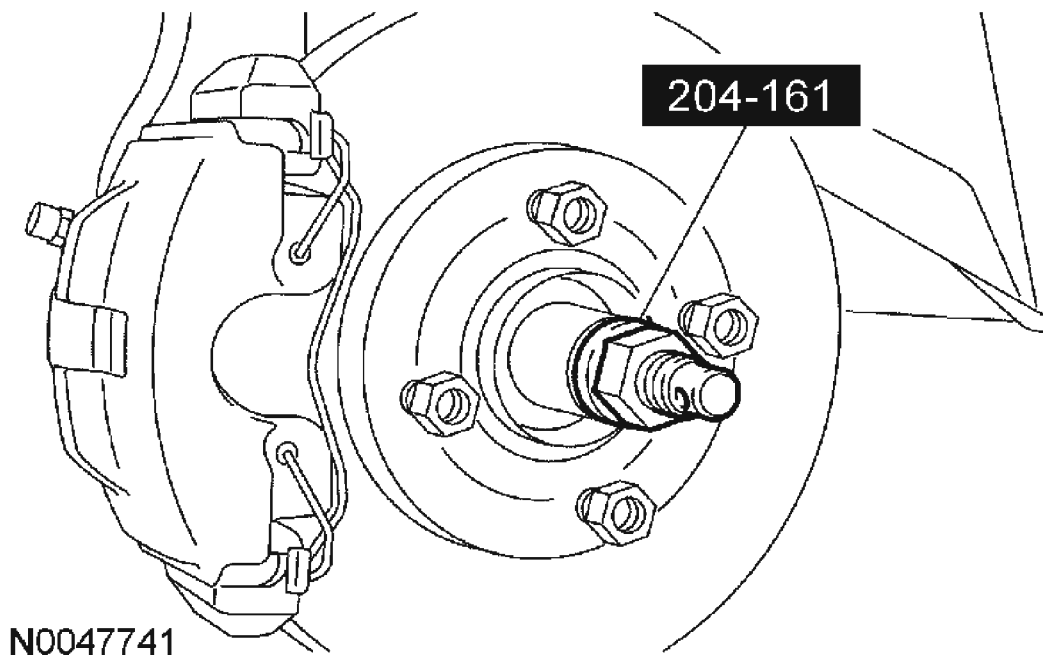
Installing LH Halfshaft Stub Into Wheel Hub Using Special Tool
